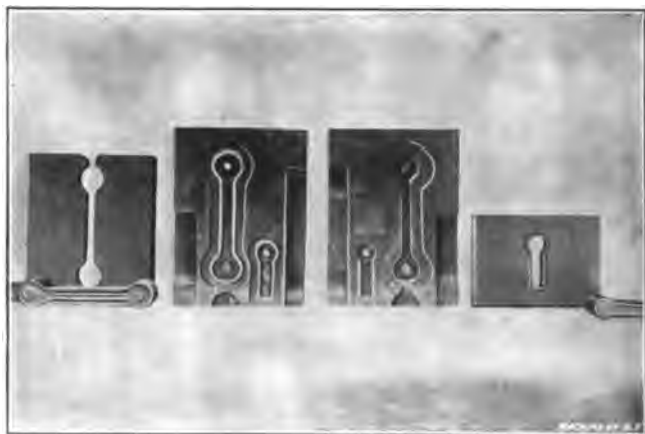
Set of Dies for Drop-forging and Trimming Shackles and Pins
